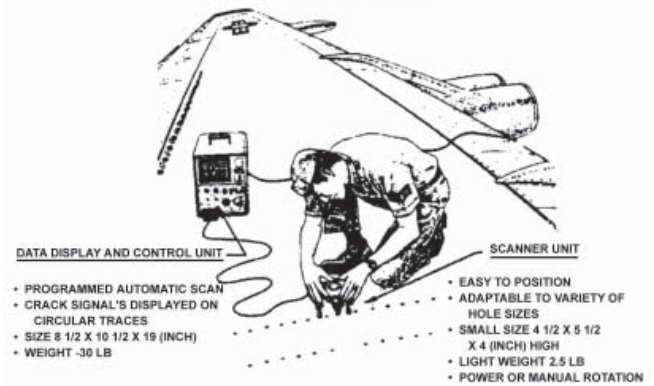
Illustration of Field Use of Ultrasonic Fastener Hole Inspection Scanner.
